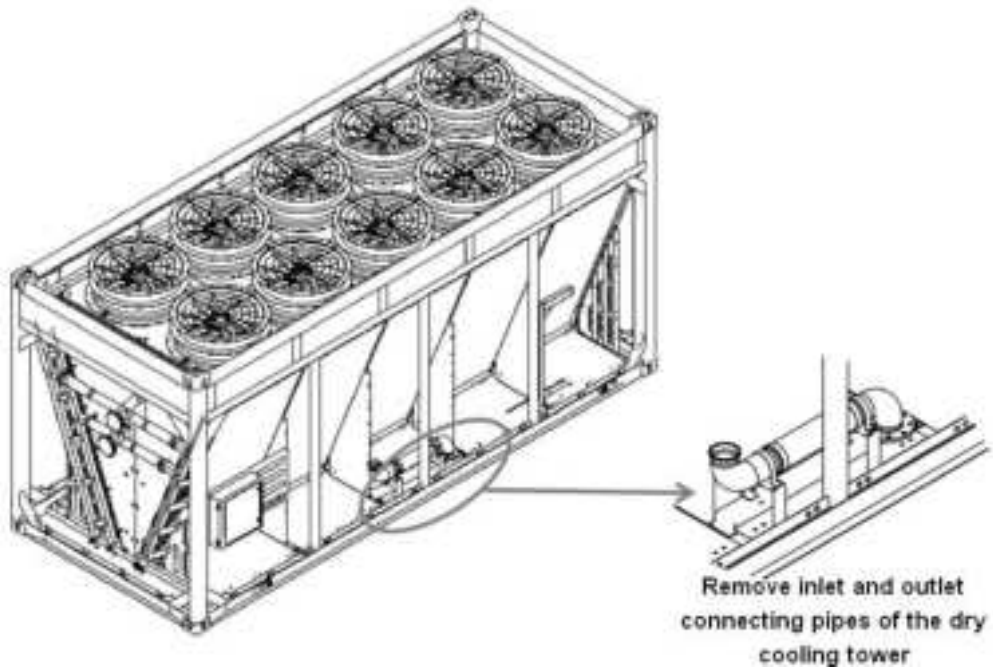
Remove inlet and outlet pipe components of the dry tower
